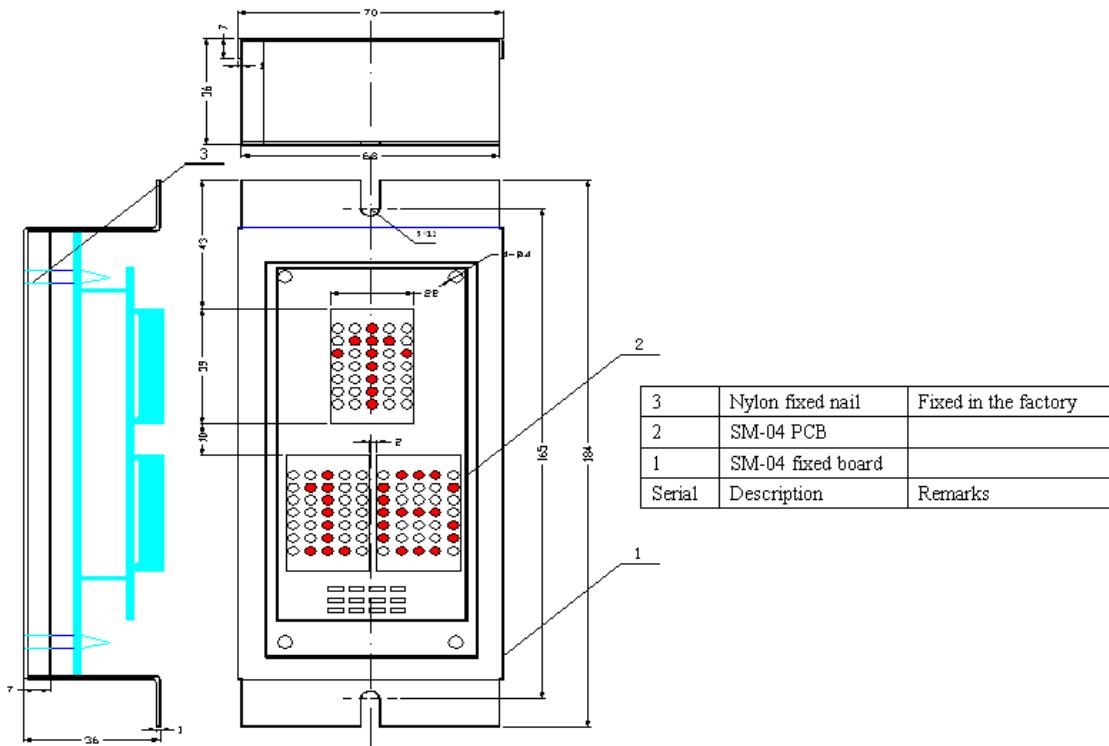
Mounting Dimensions of SM-04-VHL
